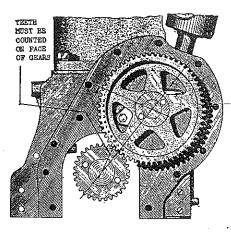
Valve timing on 361, 426, 451 and 477 engines
